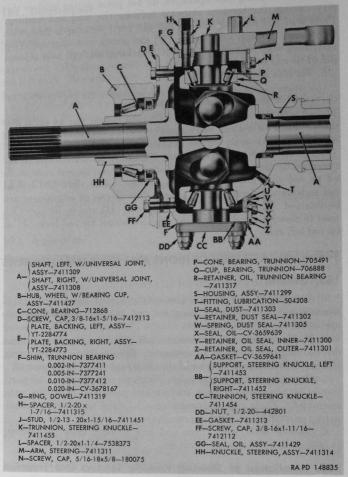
Sectional view of steering knuckle, support, and universal joint assembly.
